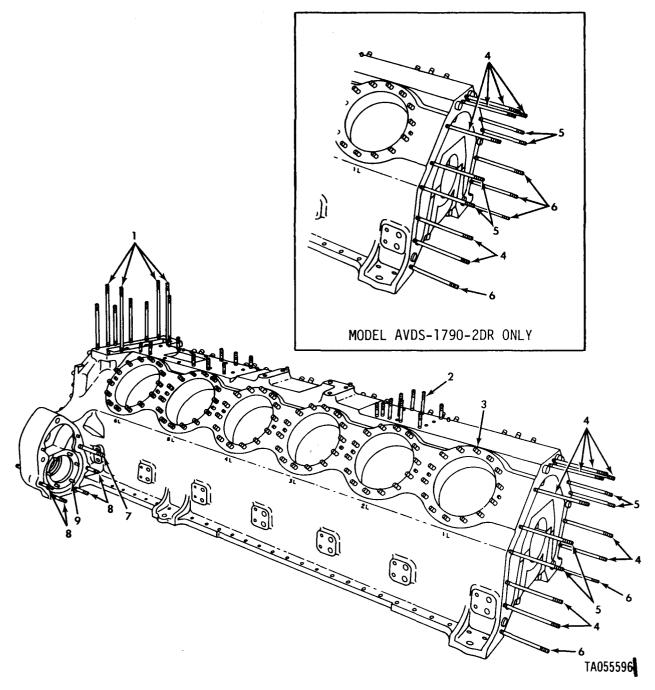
Crankcase studding, 3/4 left front view, model AVDS-1790-2C and AVDS-1790-2D engines.
